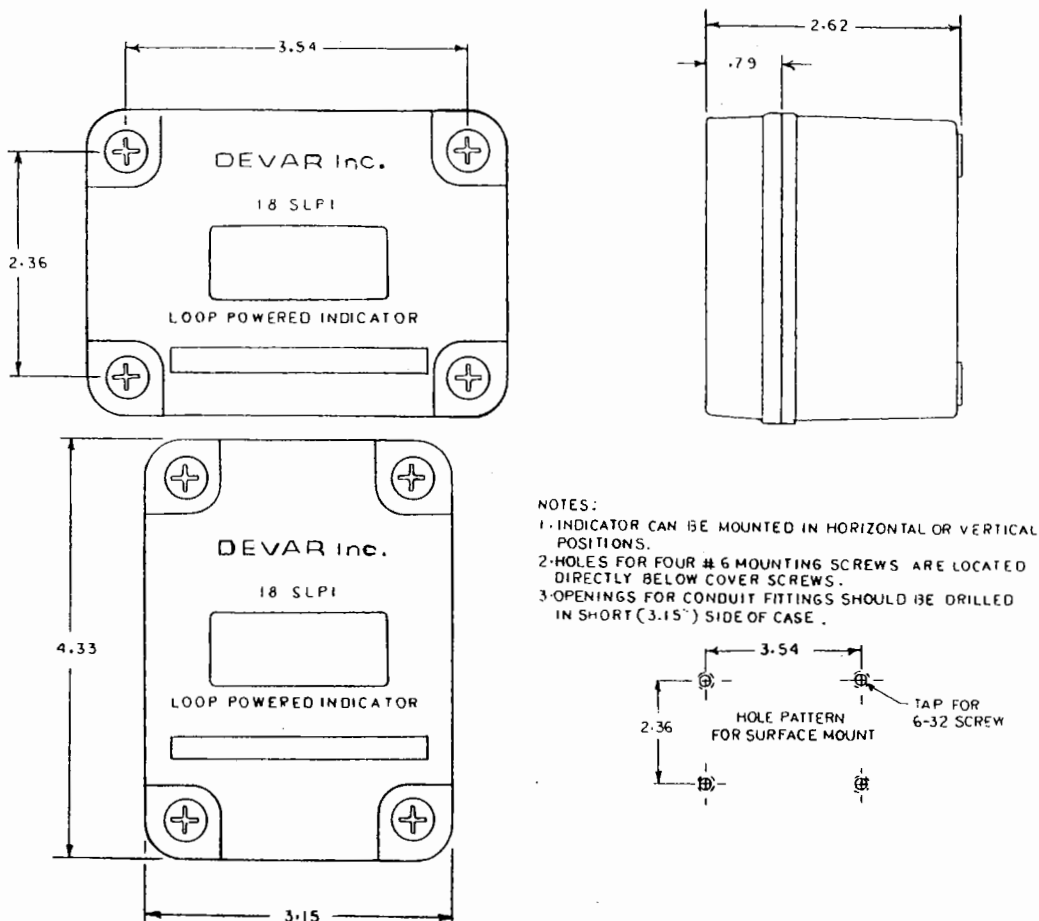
GENERAL DIMENSIONS FOR 18-SLPI-1V
